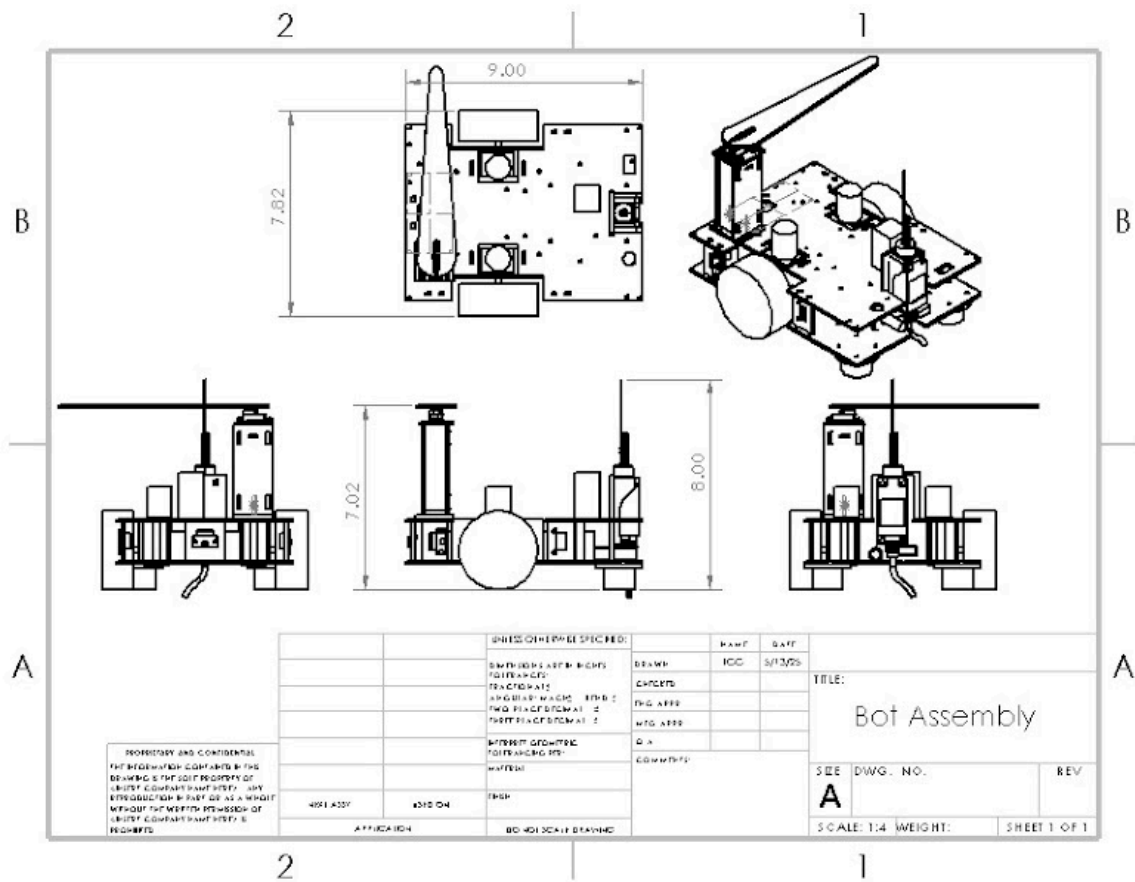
CAD Drawing of Bot Assembly. Drawings of selected individual components are featured below.
